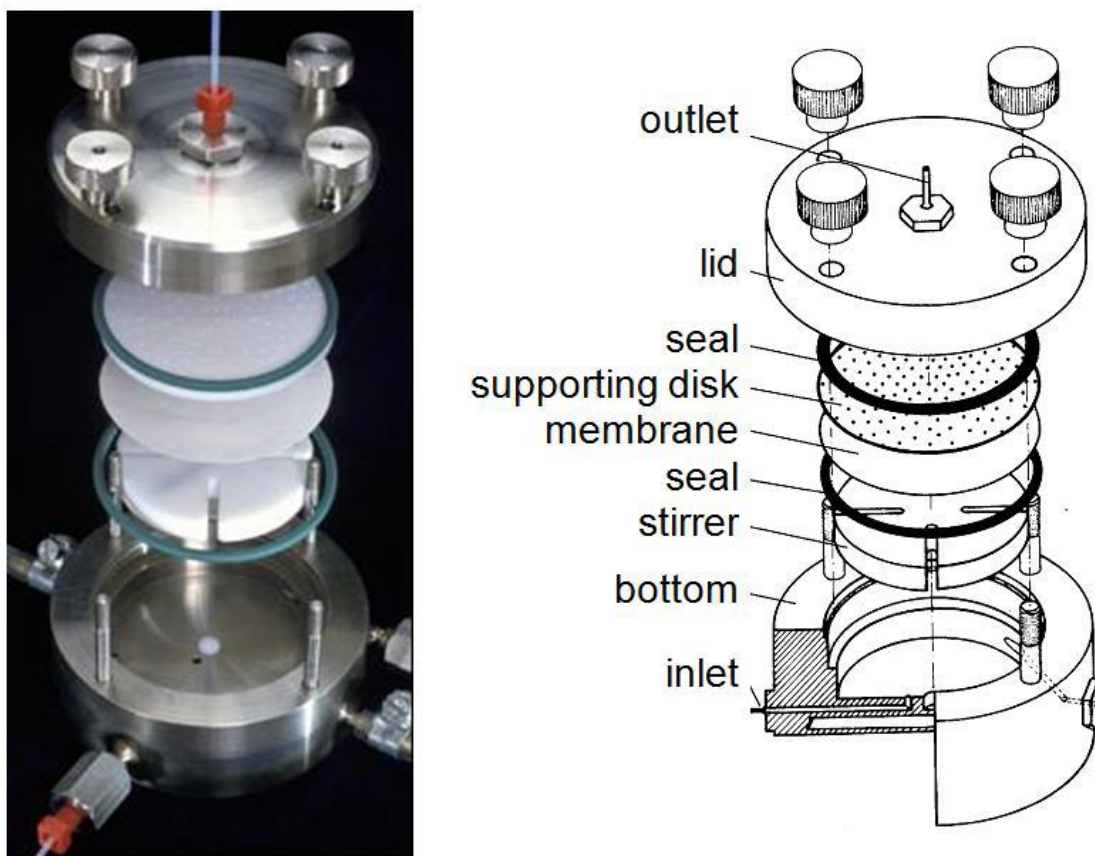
Setup of the enzyme membrane reactor. Left: photographic picture of the components, right: exploded-view drawing (EDS Maschinenbau GmbH, Germany, Linnich) (Wichmann *et al.*, 1981).
